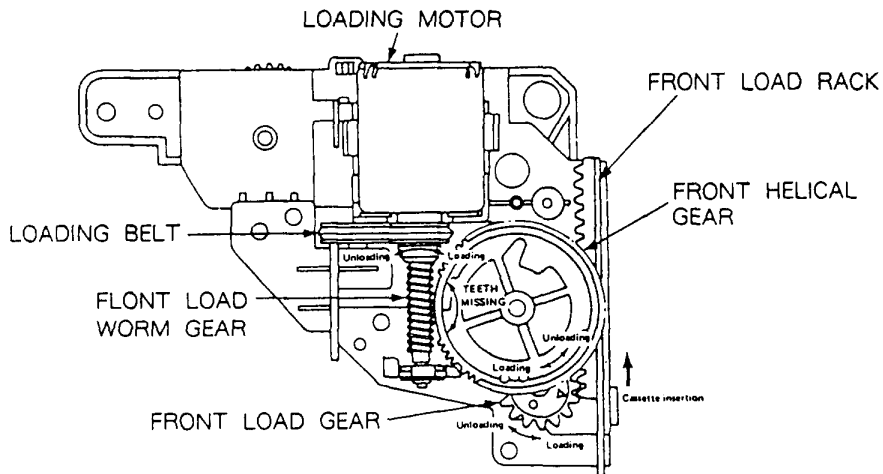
(a) FRONT LOADING DRIVE SELECTION MECHANISM (CASSETTE INSERTED POSITION)
